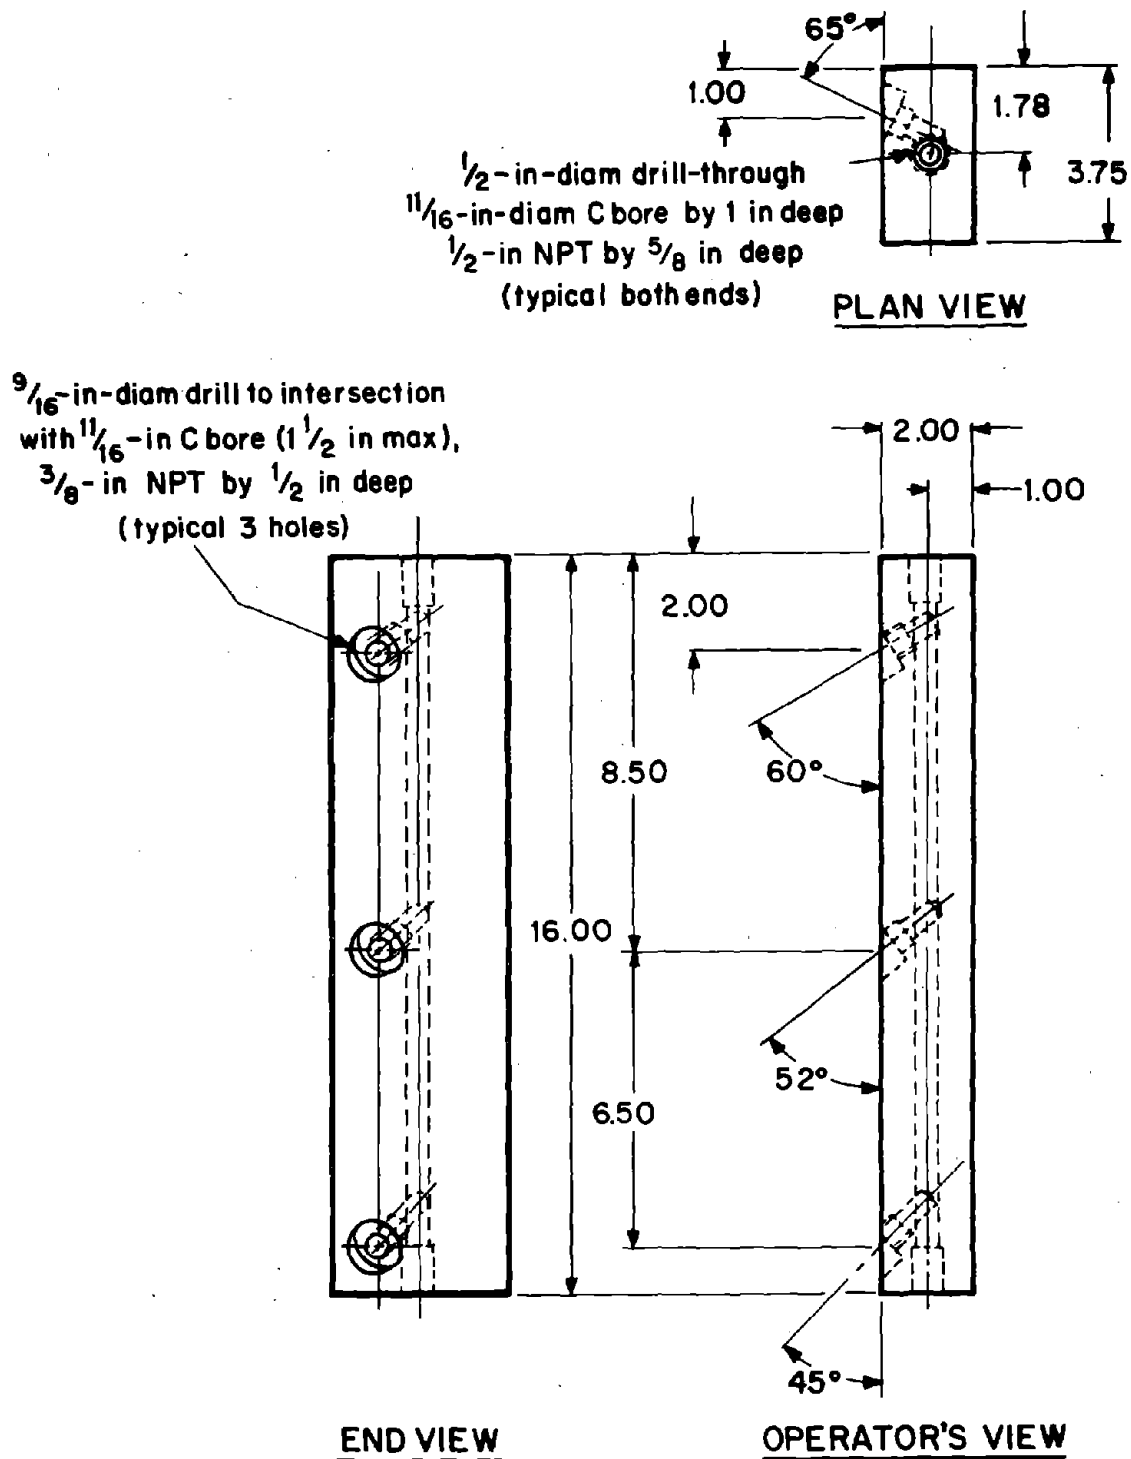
Water spray manifold 7. All dimensions are in inches.
